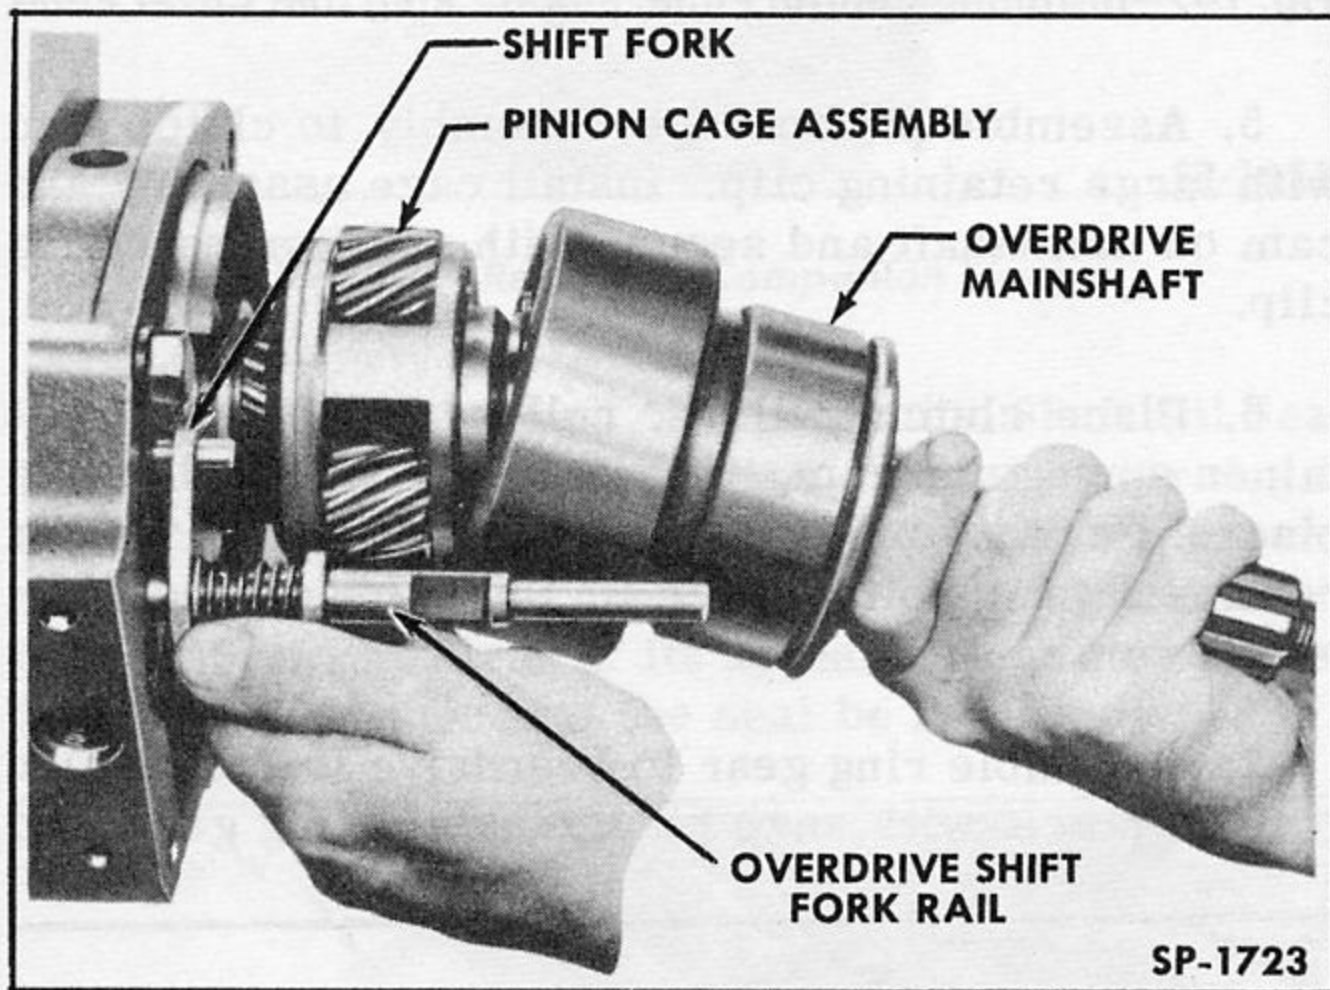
Installing Ring Gear and Overdrive Mainshaft
